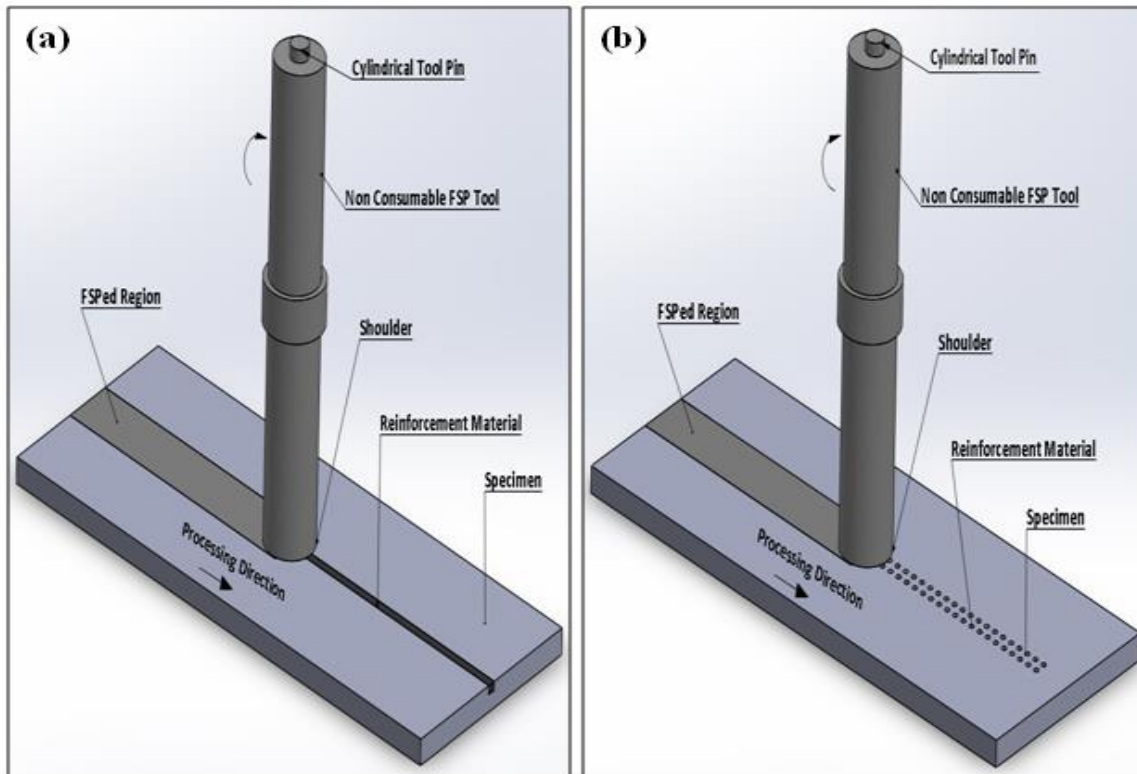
(a, b) Schematic drawing of cylindrical tool pin profile with groove and holes methods
